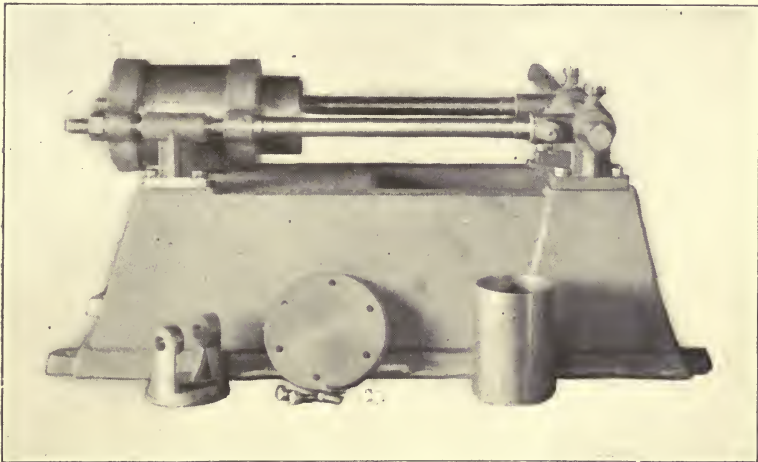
CYLINDER, SIDE RODS AND BEARINGS ASSEMBLED AND BOLTED TO BED PLATE.
